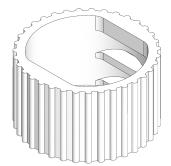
Fixture prototype V6.0 - Pole Clamp Ring - Large
